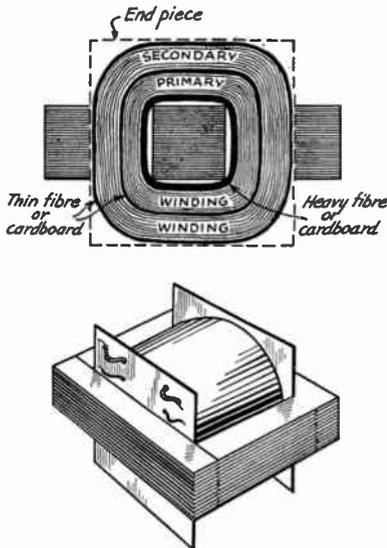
A CONVENIENT METHOD OF ASSEMBLING THE WINDINGS ON A SHELL TYPE CORE
